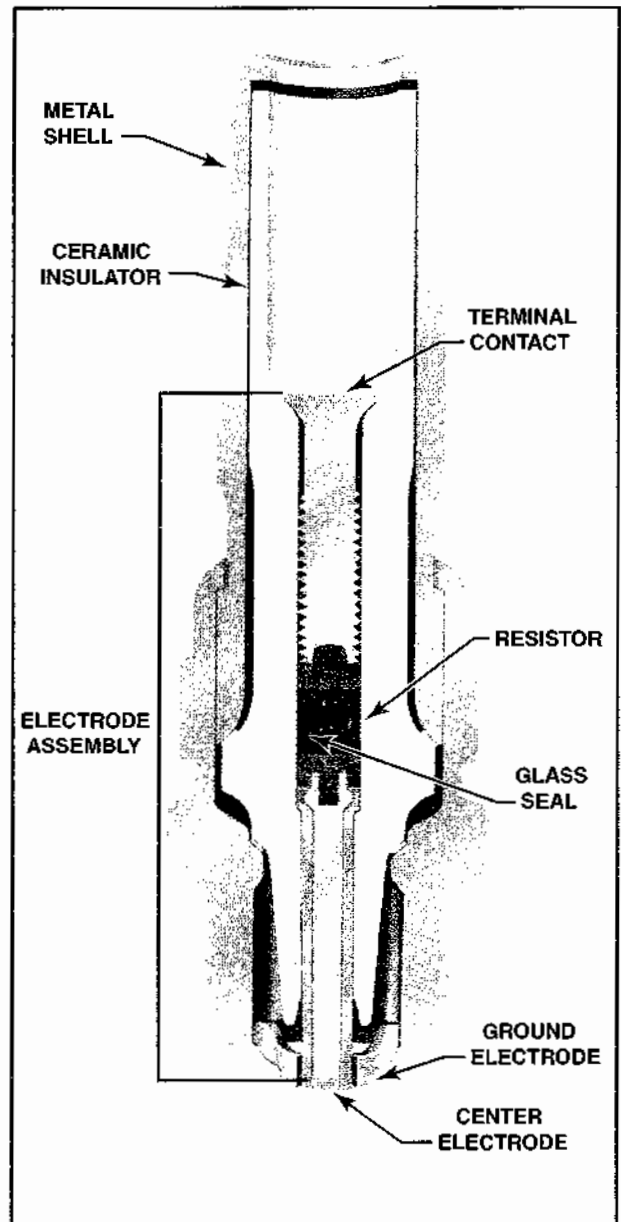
The three basic components of a spark plug are the metal shell, a ceramic insulator, and an electrode assembly.
